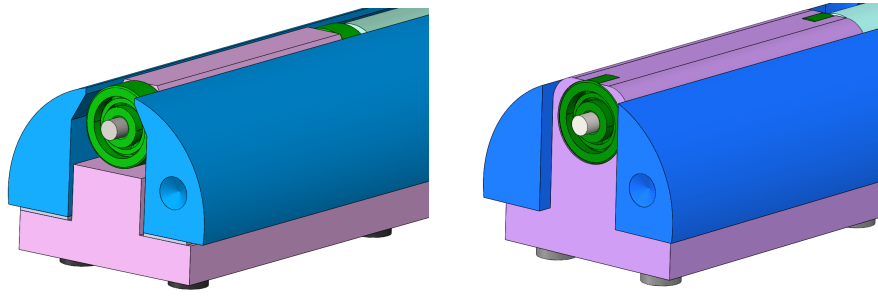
Mounting of the bearings for the beta axis. The blue part is the upper housing, the pink part is the mounting block and the green parts are the ball bearings. *Left*: Initial mounting of the bearings for the beta axis against a V-groove in the upper housing. *Right*: Improved mounting of the bearings for the beta axis using a mounting block.
